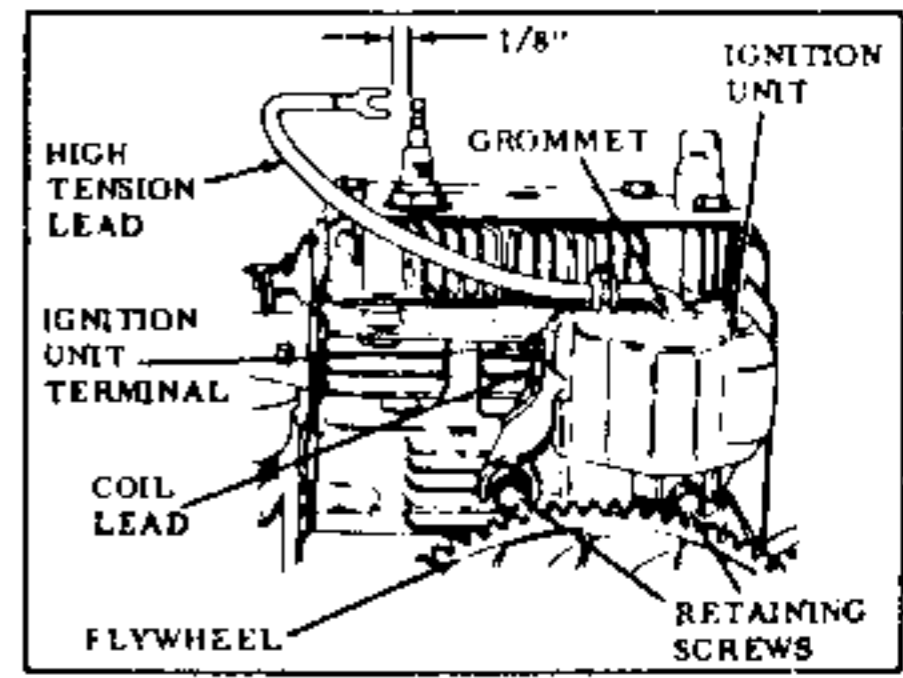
View of solid state ignition unit used on engine equipped with flywheel alternator. System should produce a good blue spark 1/8-inch (3 mm) long at cranking speed.
